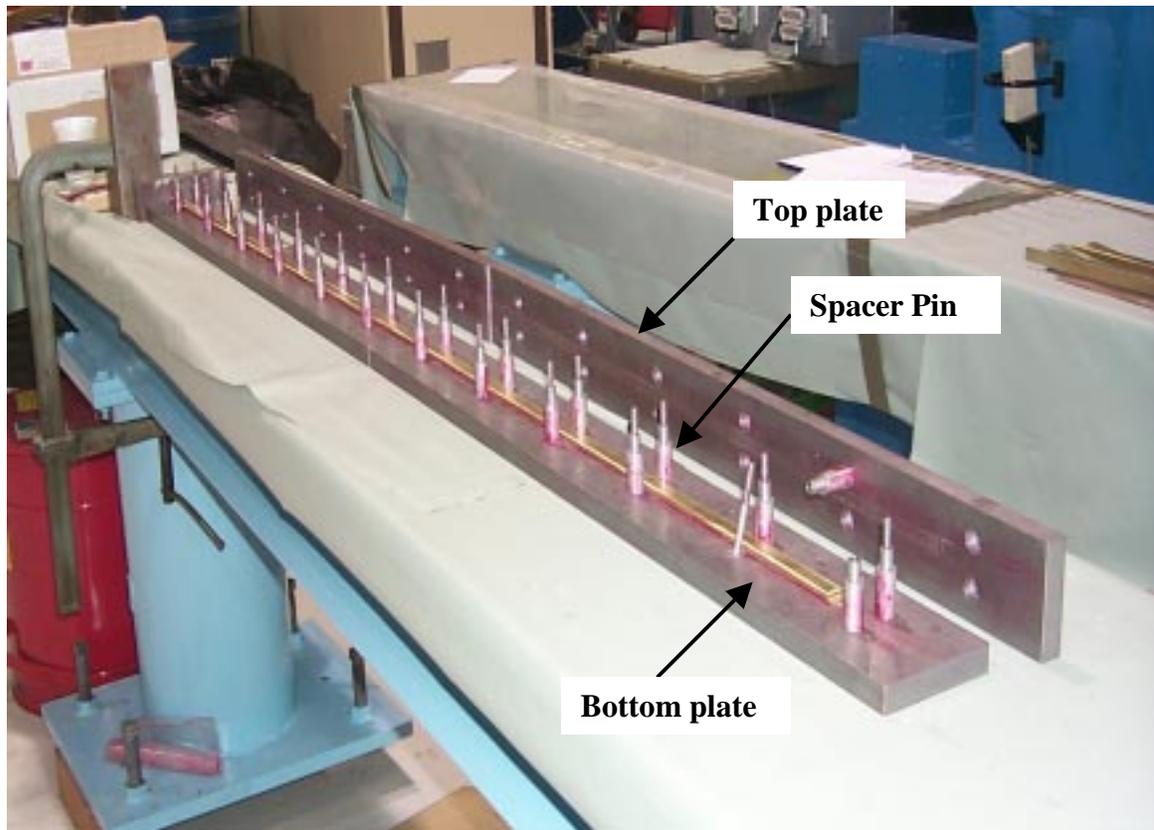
A photograph of the assembly fixture used to assemble the tuning shims together. The top plate gets bolted down to the bottom plate while the spacer provides very precise control on the assembled thickness of the tuning shim stack.
